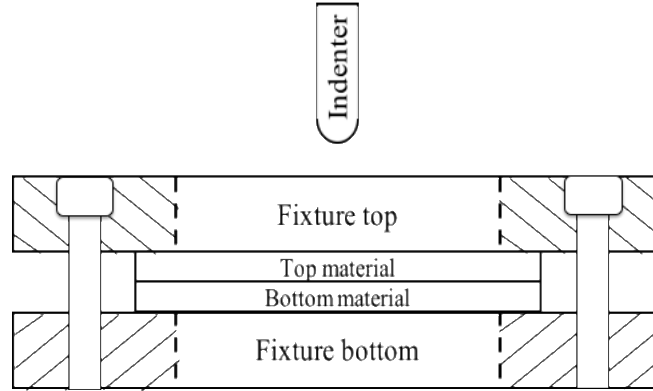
Sample holding fixture for QSI and Drop-Weight Impact Testing.
